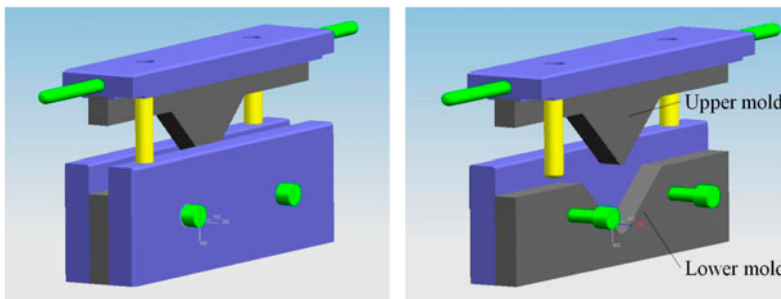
L-shaped molds – (left) the outer appearance (right) the inner geometry.
